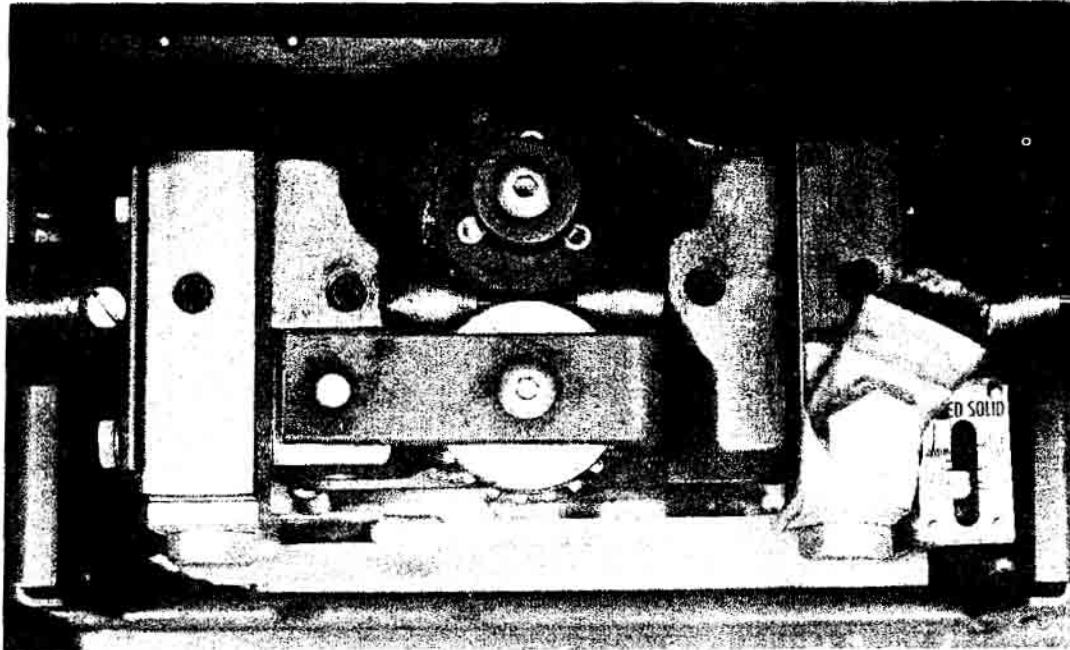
LN-8 and LN-9 Drive Roll Assembly.
